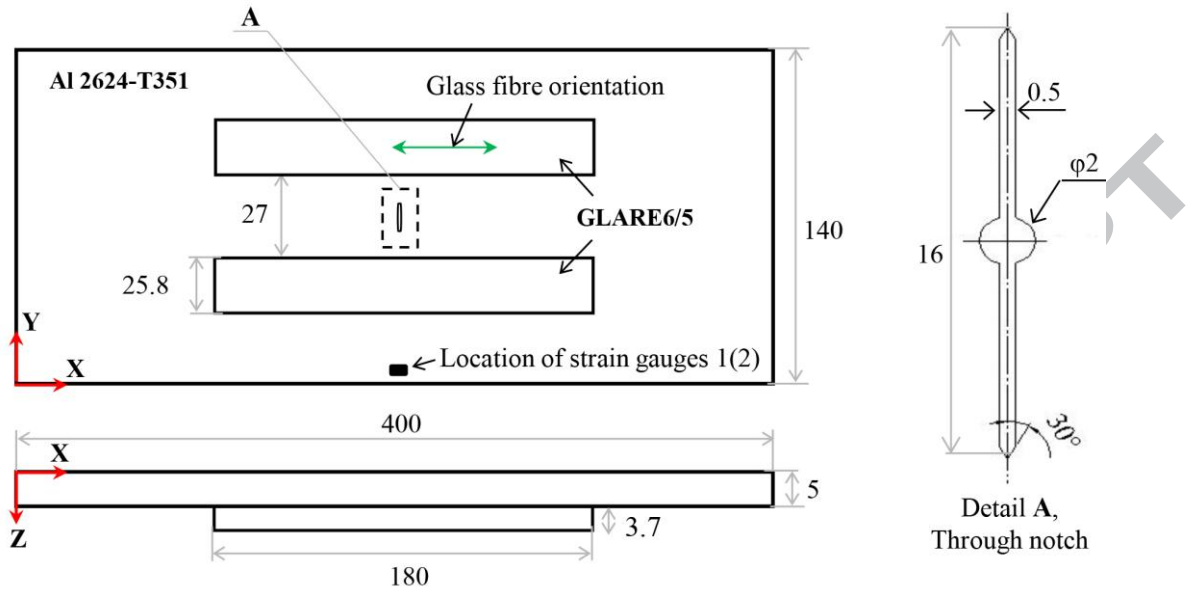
Geometry and dimension of the M(T) specimen with GLARE bonded crack retarders and the strain gauge locations (strain gauge No.2 on back side). Units: mm.
